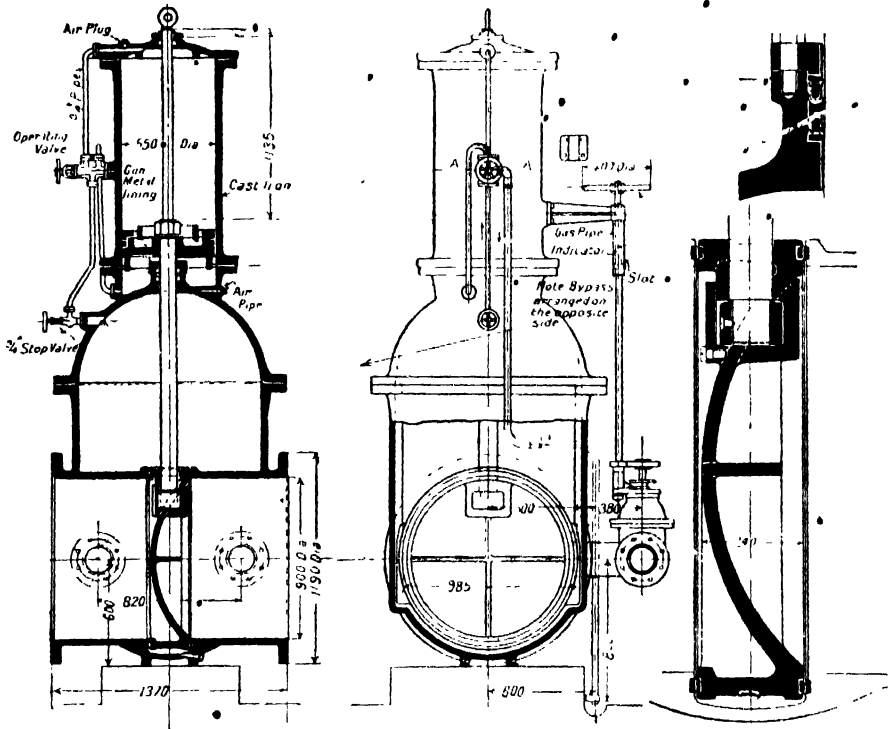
Sluice Valve operated by Hydraulic Cylinder
